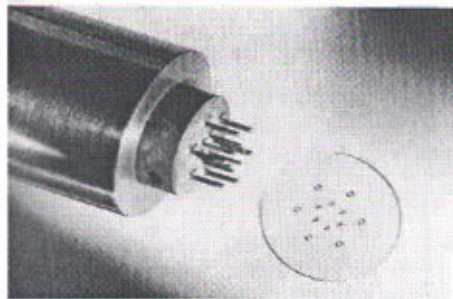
USM gang drill tool for drilling 12 holes simultaneously [48].
